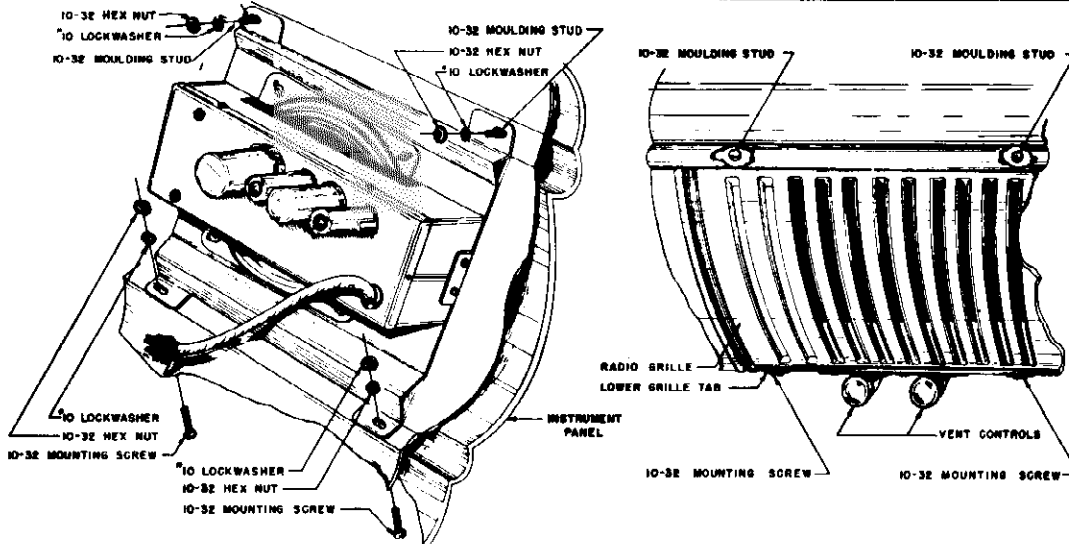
POWER SUPPLY UNIT DETAIL MOUNTING ASSEMBLY
